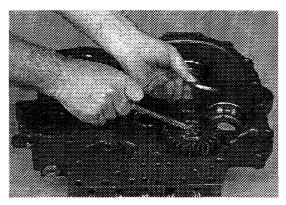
Position idler gear end plate and roll pin on idler shaft aligning roll pin with hole in idler shaft.
